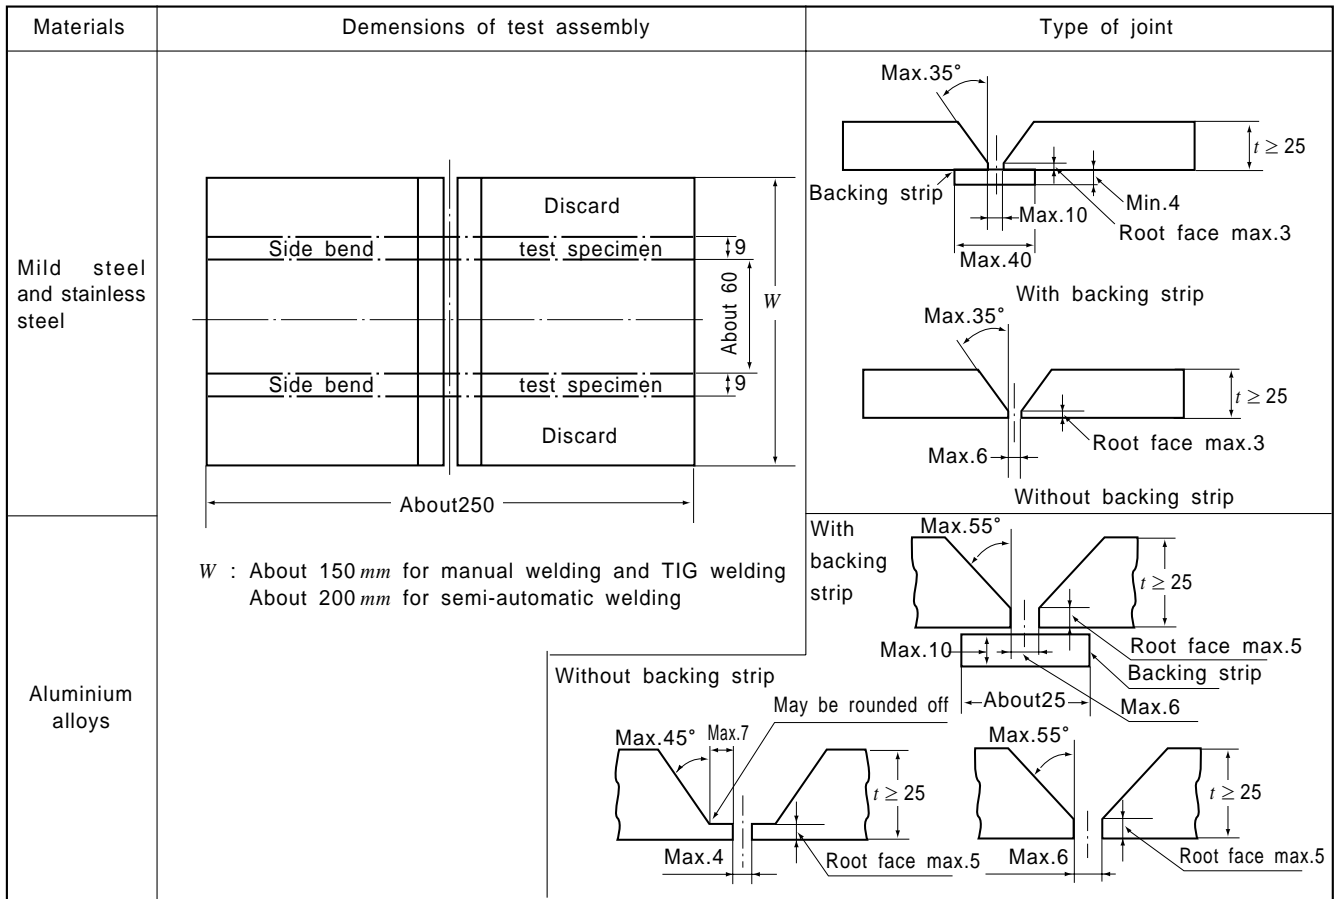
Dimensions and Types of Test Assemblies for Plates of Grade 3 (unit: mm)
